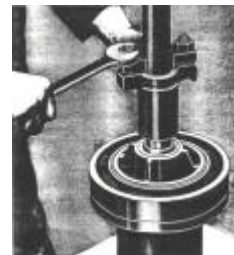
Dismantling the cone coupling with the aid of a puller device
